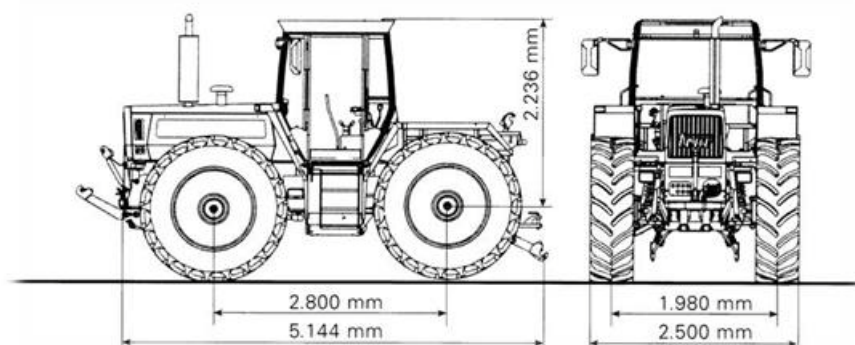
Front and side view of the test-tractor with some relevant dimensions.
